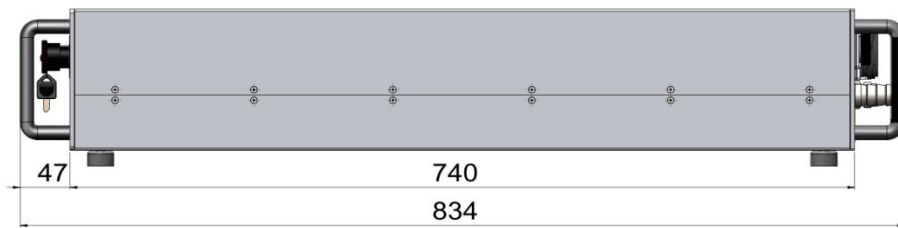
(a) Side view of 3000W fiber laser (unit: mm)
